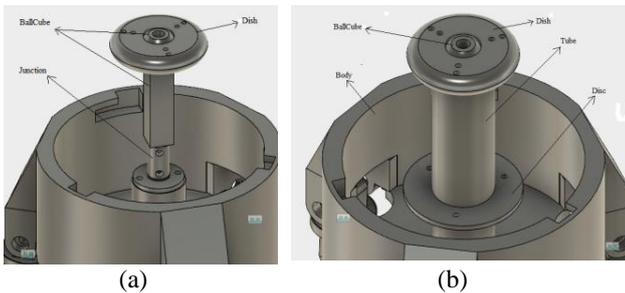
Bottom view of the 3D design of the under actuated gripper: (a) second assembly, (b) third assembly
